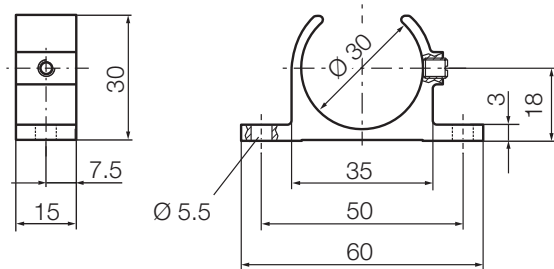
BTL6-A-MF01-A-50 mounting clamp
